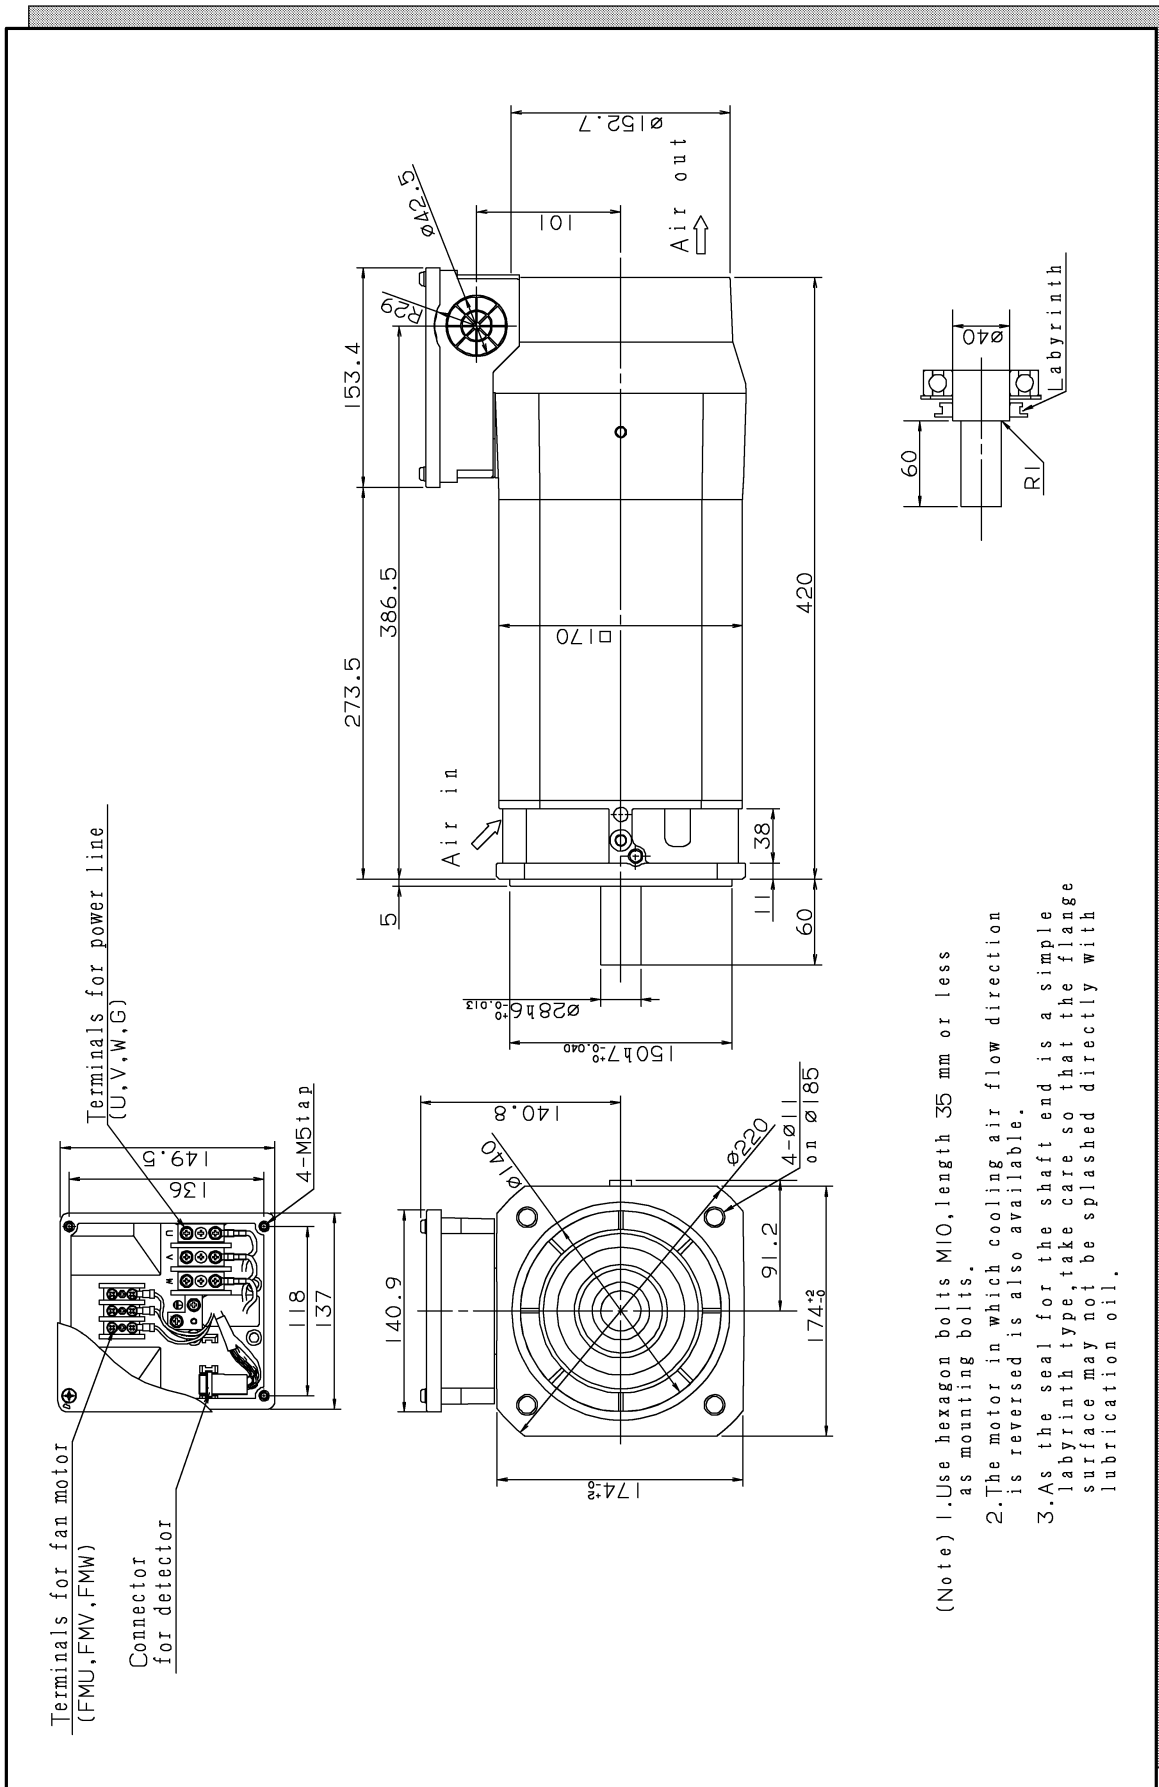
(x) Model α 3/12000 (Flange mounting type)
